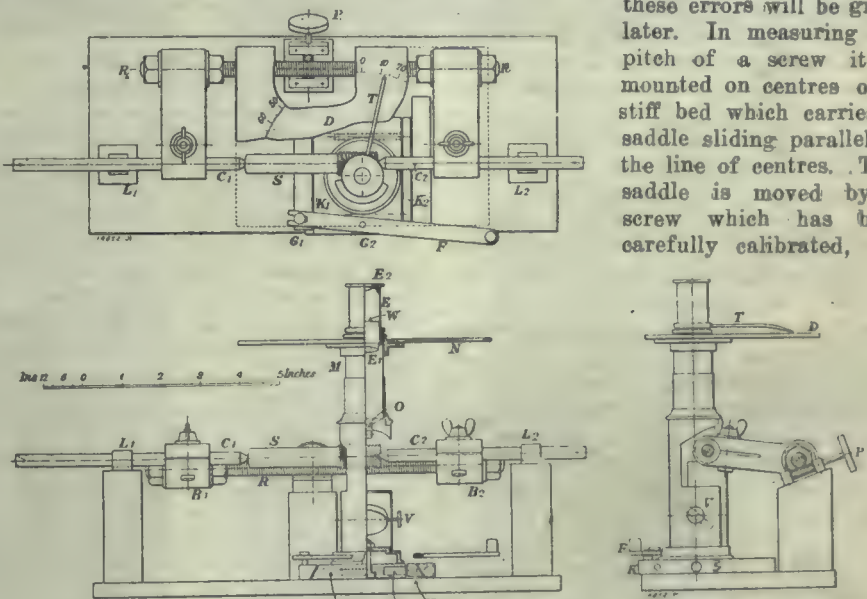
APPARATUS FOR MEASURING THE ANGLE AND FORM OF A THREAD.
